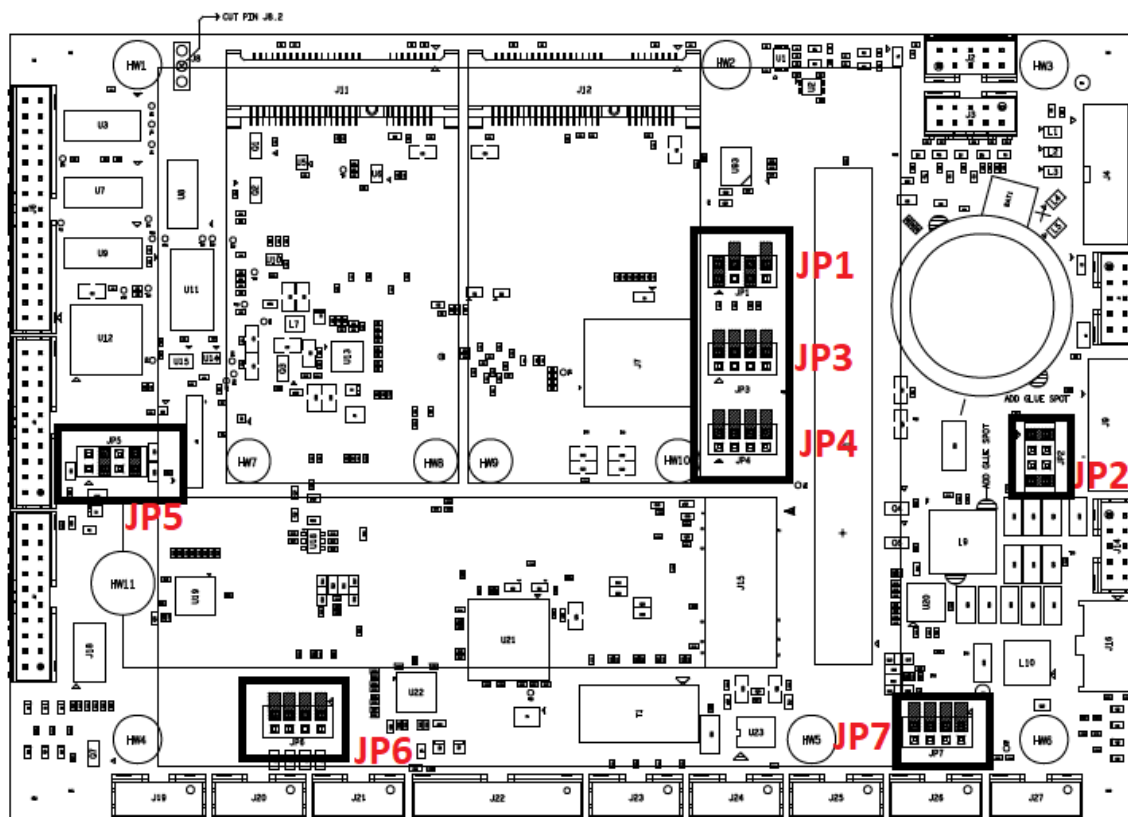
Jumper Blocks on Jasper Carrier Board
